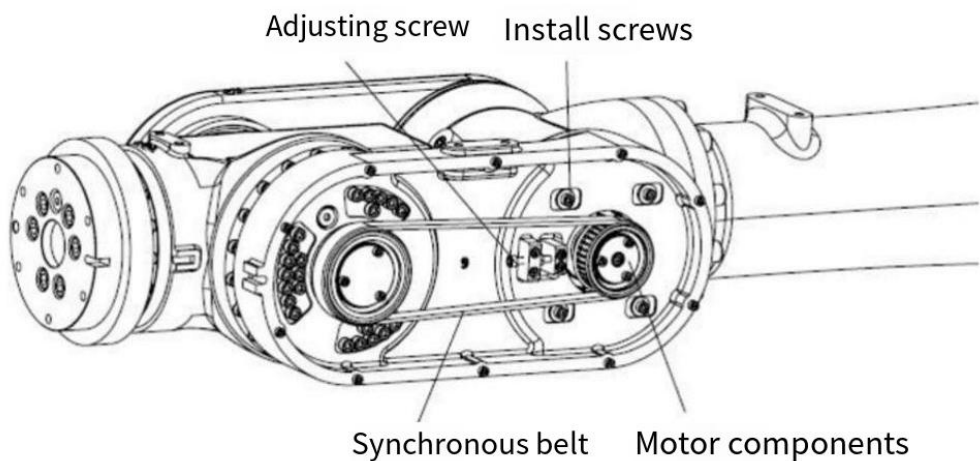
RX3-A650-2260/RX3-A650-2700 Synchronous Belt Disassembly
